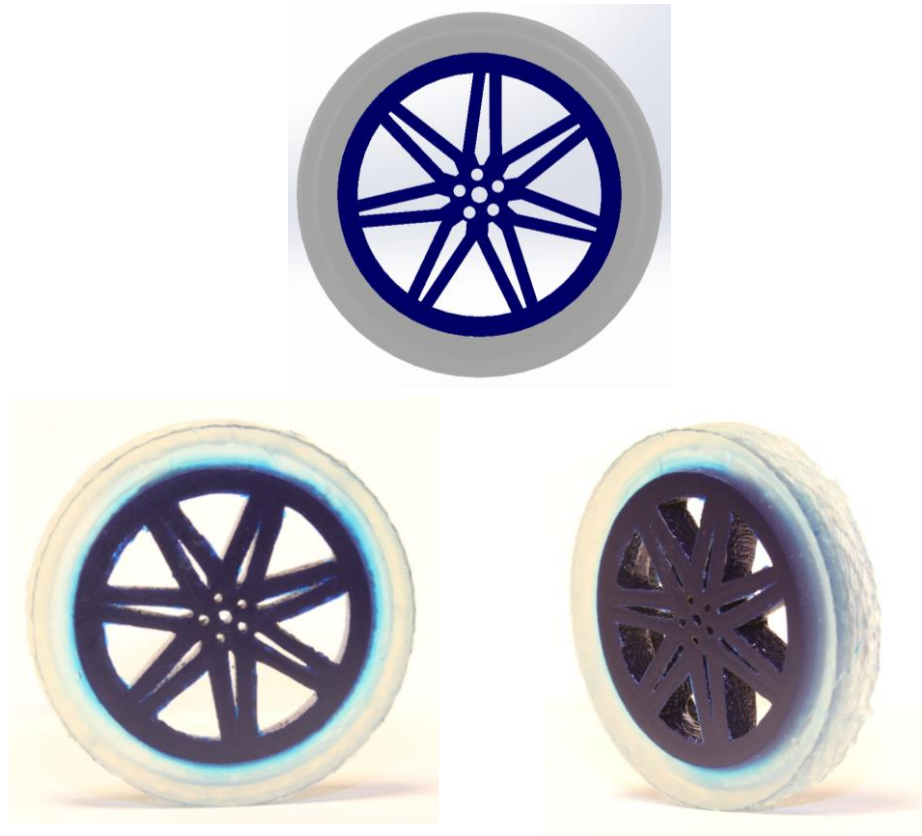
Car wheel replica Hybrid 3D printed with Inkjet and DIW materials
